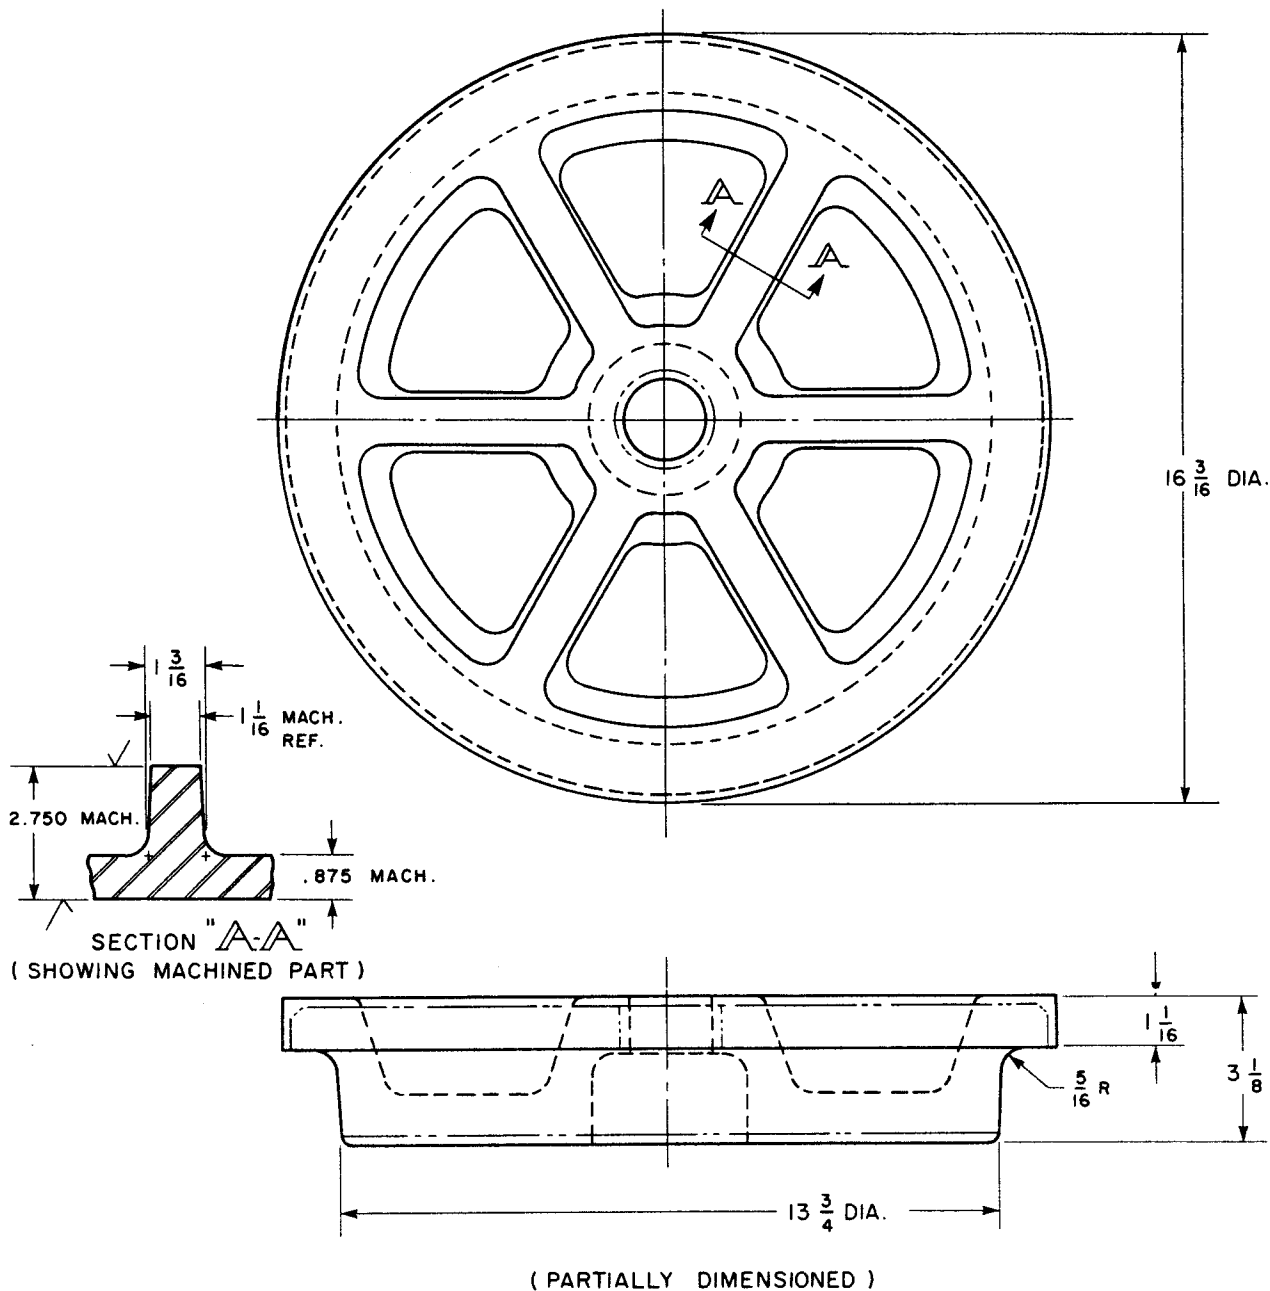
Combined casting and machine drawing of a "center plate," solid lines indicate the cast part, and broken lines the machined dimensions (dimensions in inches, conversion: 1 in. = 25.4 mm).
